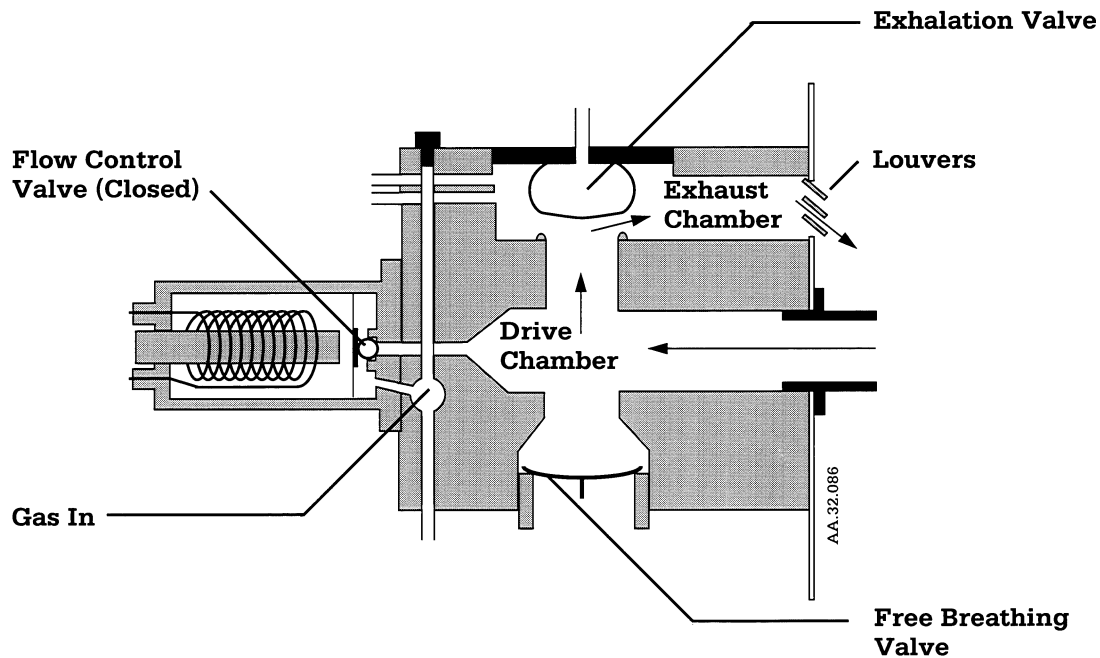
Pneumatic Manifold Assembly Exhalation
